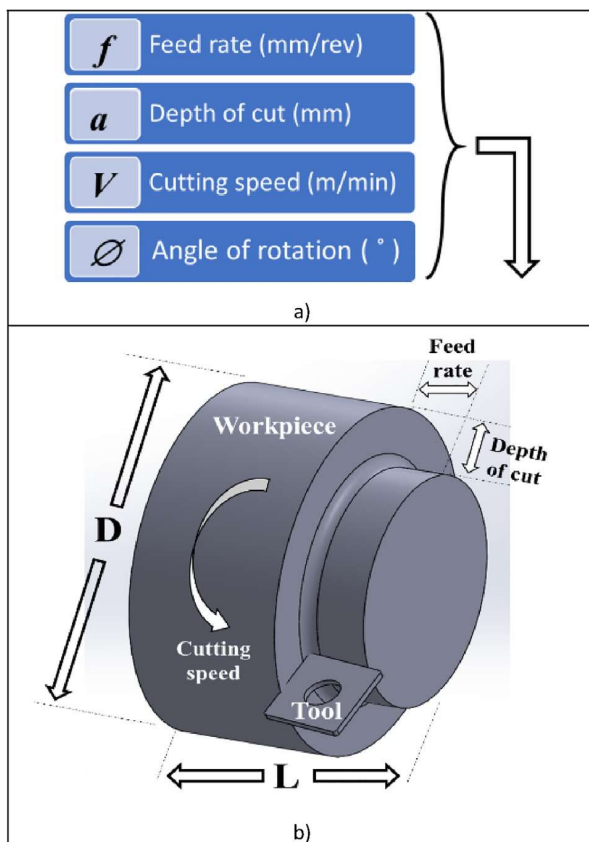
Turning simulations, a) Turning conditions, b) Dimensions of the workpiece.
